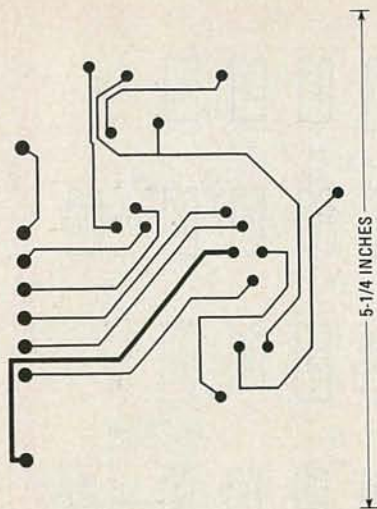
FOIL PATTERN for top of telephone adaptor board.
